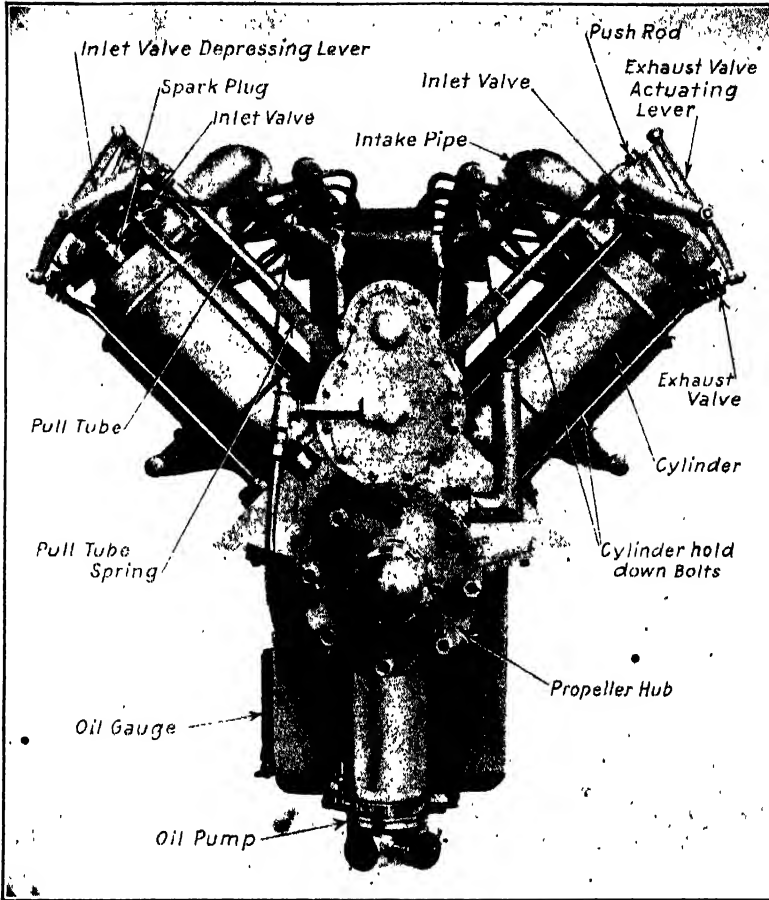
Front View of Curtiss OX 3 Airplane Motor, Showing Unconventional Valve Action by Concentric Push Rod and Pull Tube.
